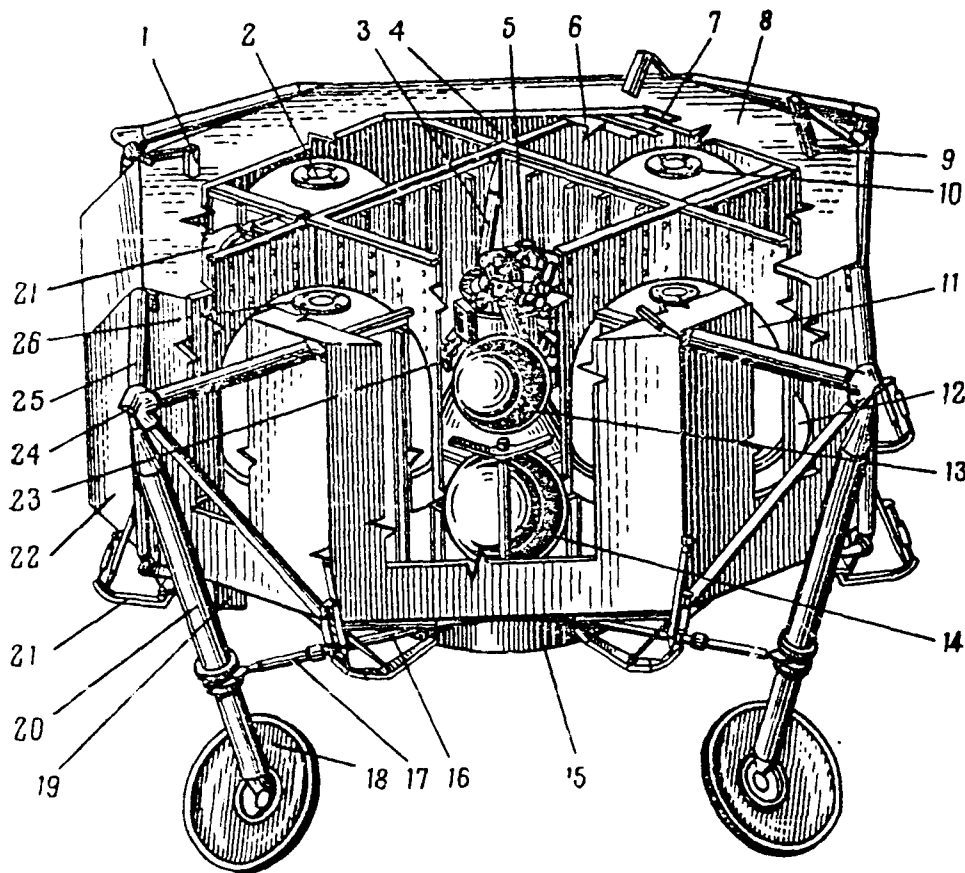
Landing stage of the lunar module (landing gear in a folded position); 1 - rear device for fastening to takeoff step/stage; 2 - fuel tank; 3 - engine bed; 4 - section for positioning portable life-support system and antenna; 5 - engine; 6 - housing of the stage; 7 - thermal insulation; 8 - heat shield; 9 - front device for fastening to takeoff step/stage; 10 - oxidizer tank; 11 - fuel tank; 12 - section for batteries; 13 - oxygen tank; 14 - tank of liquid helium; 15 - engine cowling; 16, 17 - elements of landing gear; 18 - landing gear strut; 19 - antenna of landing radar; 20 - landing gear strut; 21 - section chassis/landing gear; 22 - section for scientific instruments and equipment; 23 - articulated suspension of engine; 24 -
